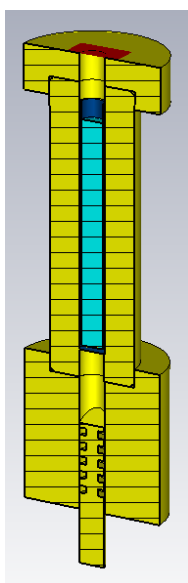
CAD drawing of the HiPER spectrometer sample holder.
